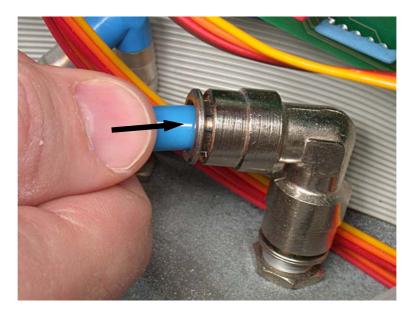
Pushing the blue tube into place on the nebulizer connector on the front panel
